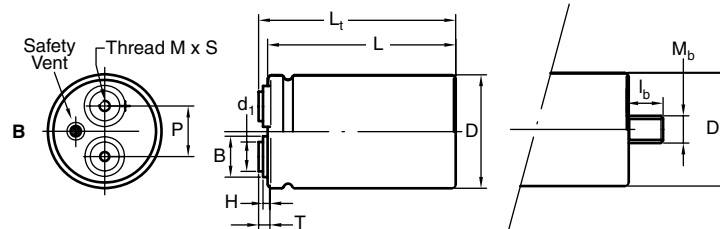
B: High current M6 disc: screw terminal (ST) and screw terminal bolt nut (STB)
